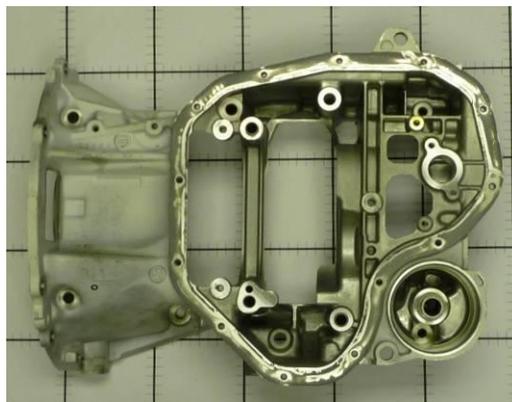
[Base Technology] Aluminum Crankcase Adapter
